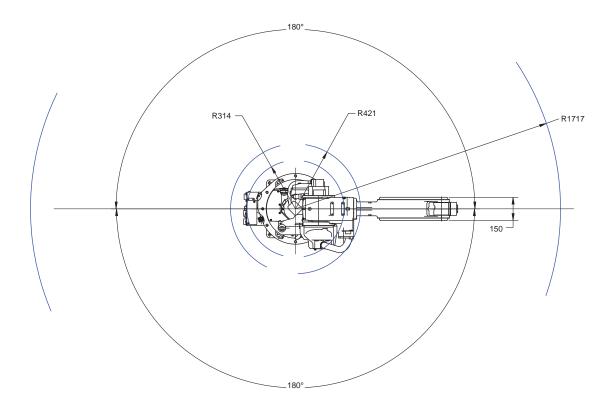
Adept Viper s1700D Top Dimensions and Work Envelope
